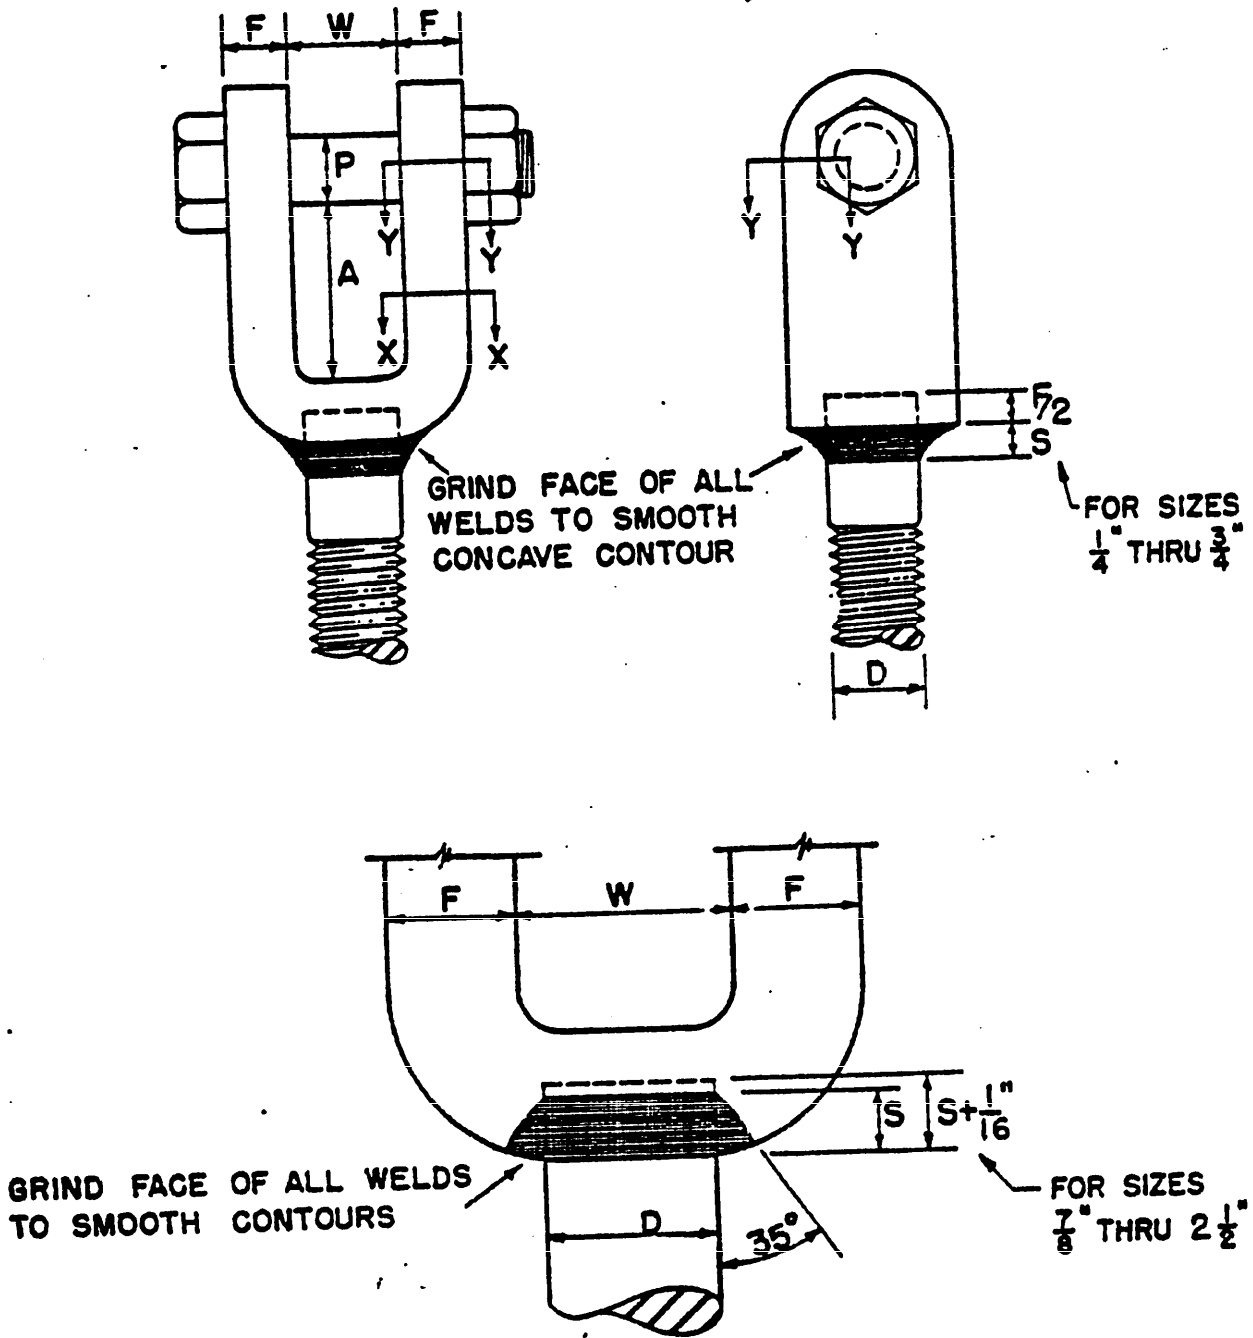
Arc- or gas-welded-jaw end pull.
